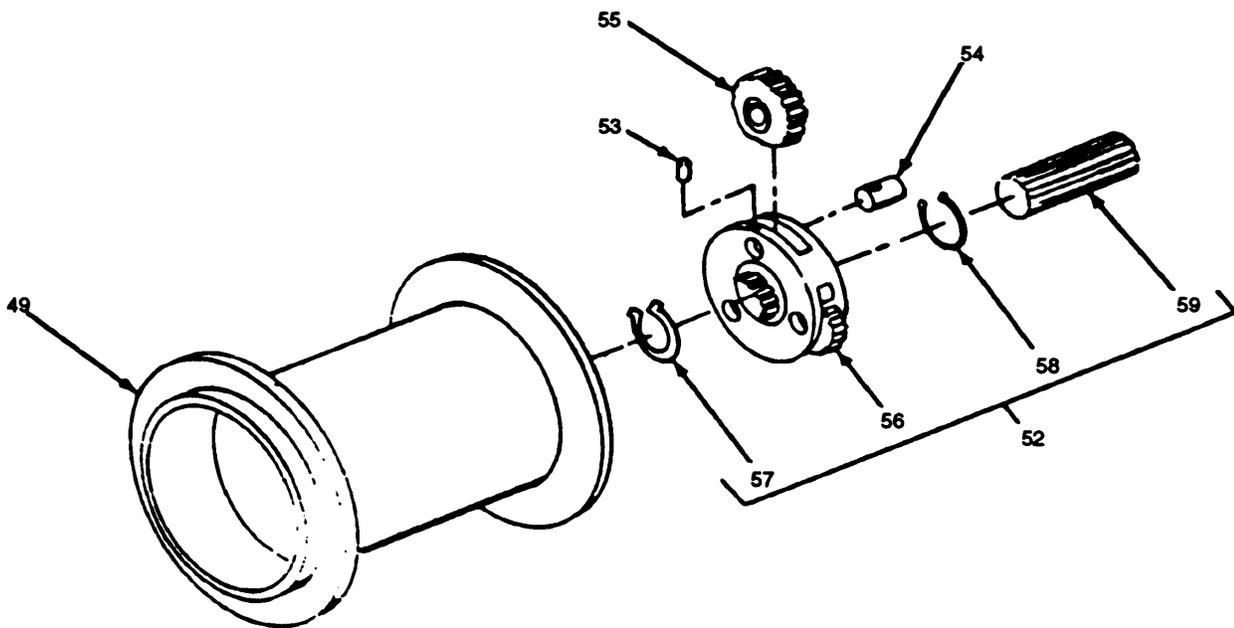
Winch Assembly Model PG-115-043R, Disassembly (Sheet 4 of 5).
